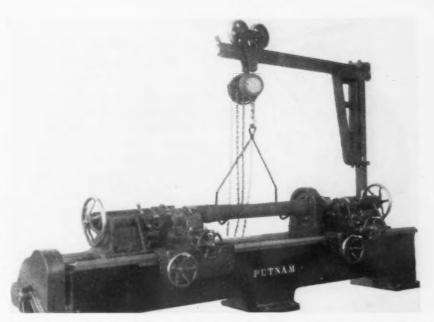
Axle burnishing lathe on which the thrust of the opposed burnishing rollers is absorbed in right and left-hand screws.
